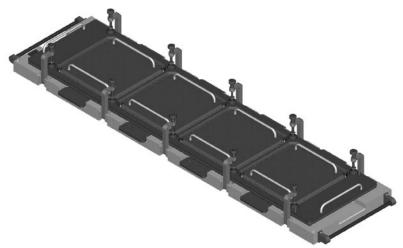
The potting fixture controls integration of KDP switch crystals into the glass midplane. (70-00-0299-0372pb01)
